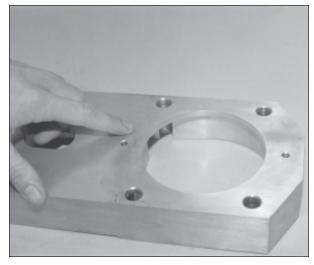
D. Gear drive box mating surface should be free of grease.
